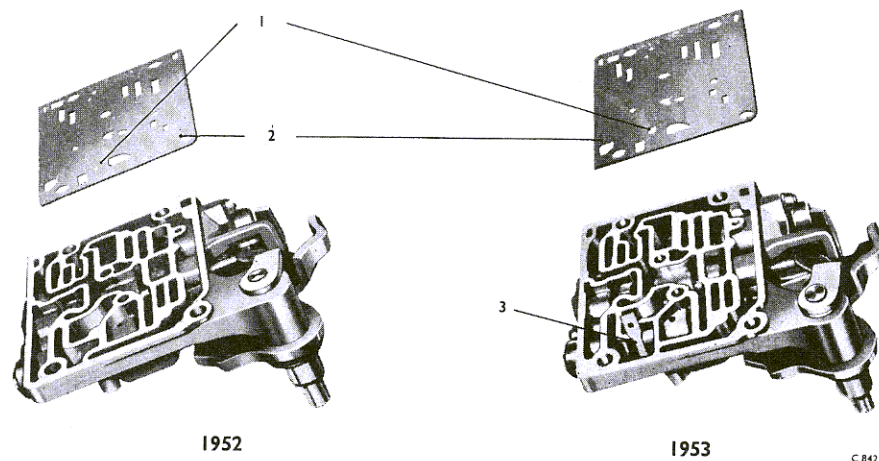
Outer bodies, oil guide plates and by-pass valve
